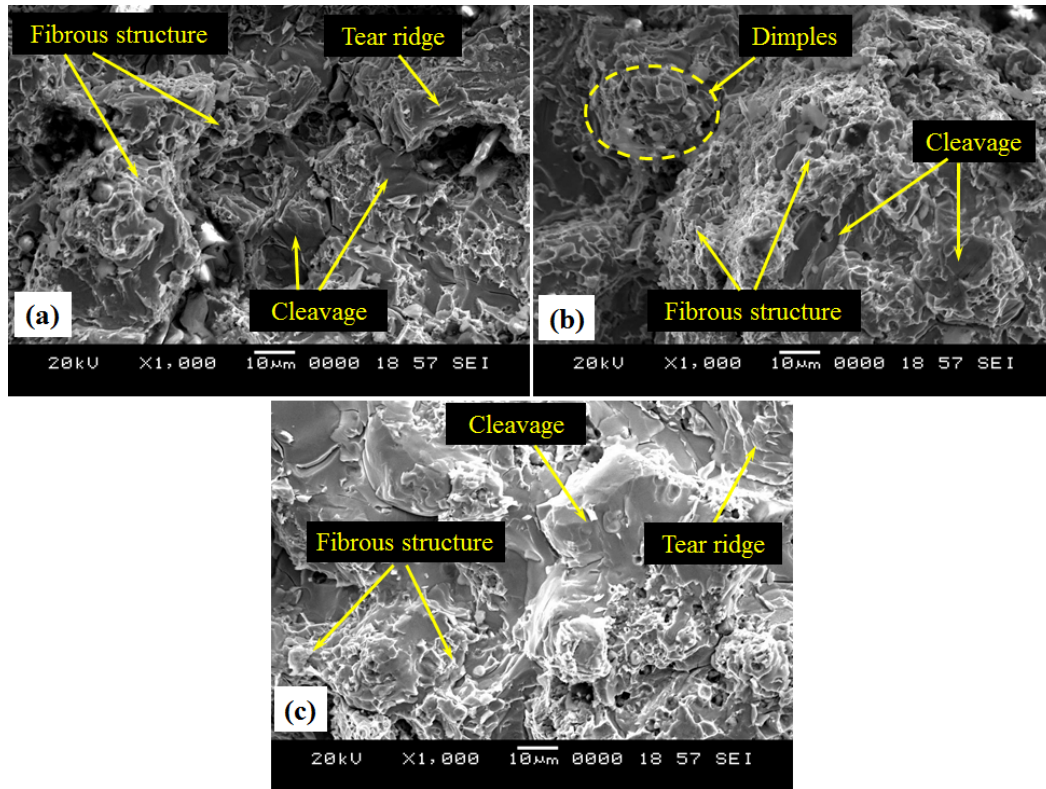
SEM micrographs showing tensile fractured surfaces of the specimens developed with 600W power
